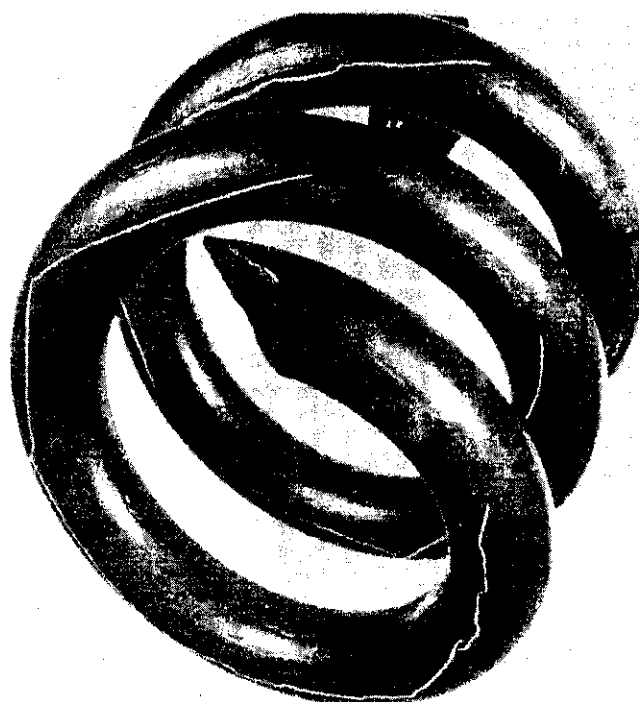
INDICATIONS OF SURFACE CRACKS
